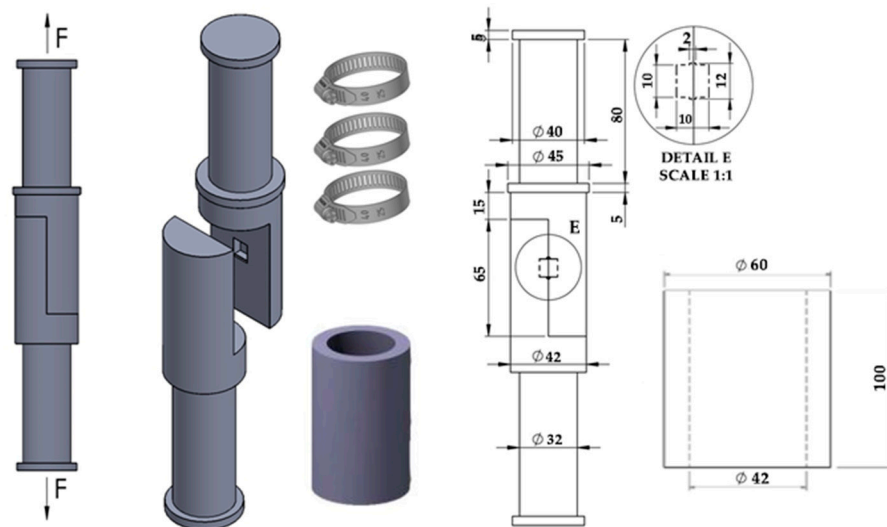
Drawing and schematic of fixture for shear strength assessment [mm].
